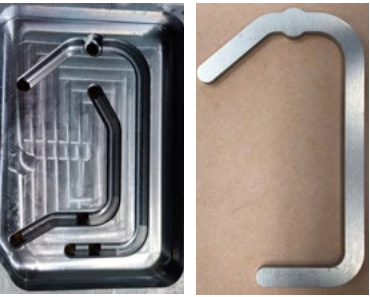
Example of cooling channels machined into the backplate (left), and associated coverplate (right).
